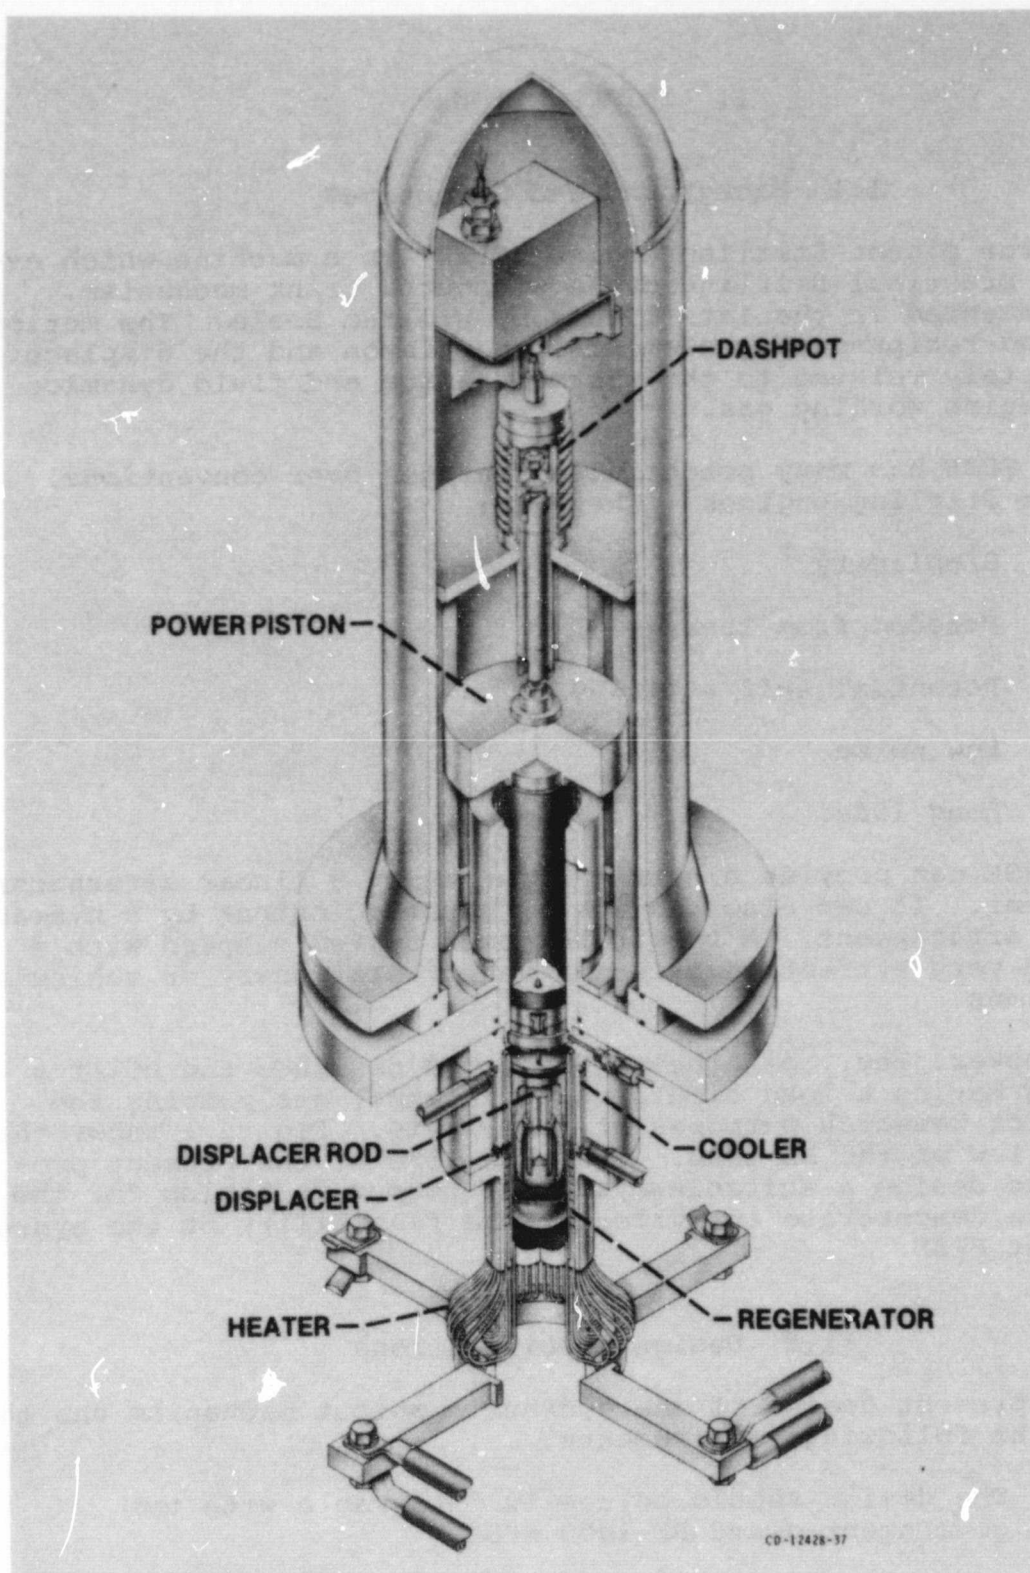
Cutaway view of RE-1000 Free Piston, Free Displacer Stirling engine built by Sunpower.
